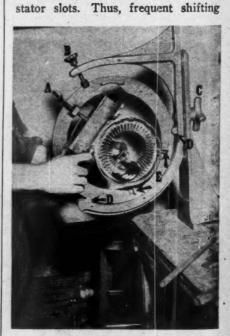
Adjustable stator holder permits rotation of stator while inserting coils. Stator is held in ring by clamps "A" and "E"; ring rotates in slots "B" and "D"; knob "C" provides vertical and angular adjustment of yoke.
